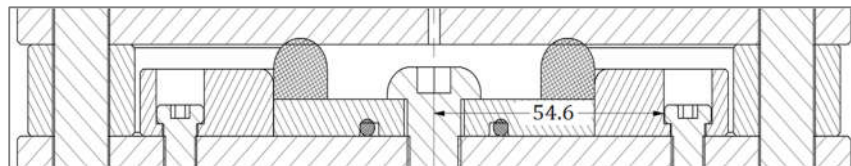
Offset between the fixture centerline and the counterbore in the gauge ring. Units are mm.
